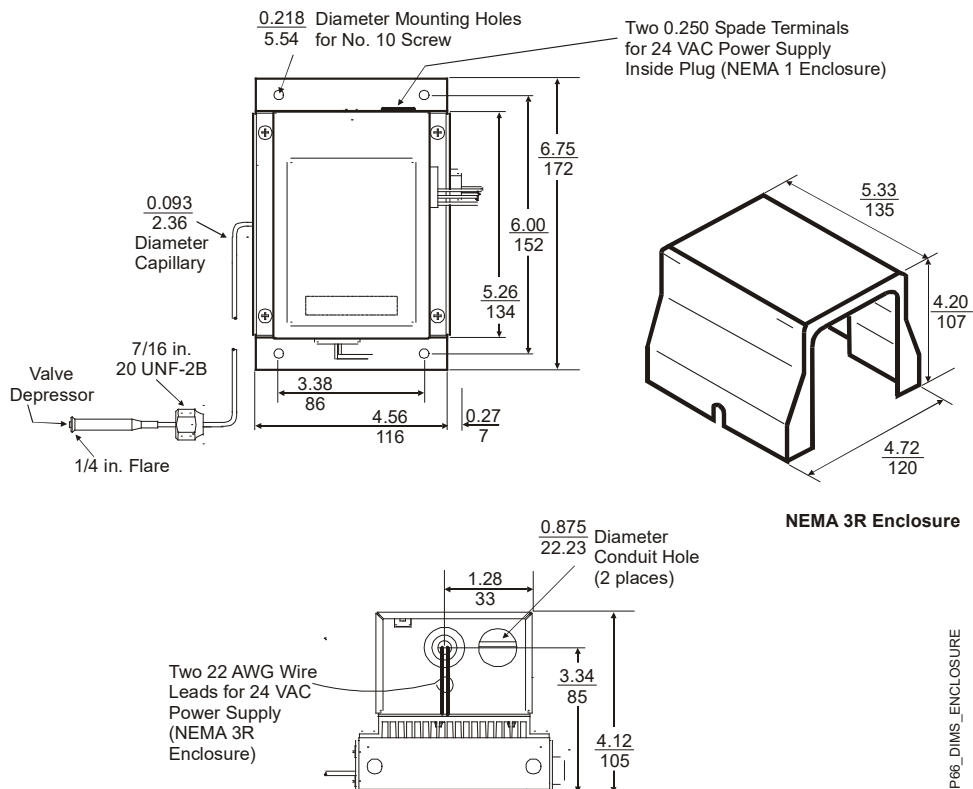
P66 Control and NEMA 3R Enclosure Dimensions, in. (mm)
